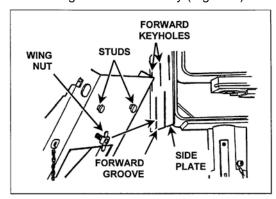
Attach the Ammunition Can Mounting Bracket Assembly
